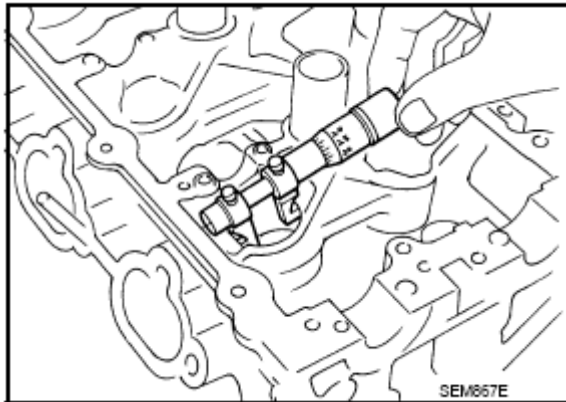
Measuring Inner Diameter Of Cylinder Head Valve Lifter Hole Using Inside Micrometer
